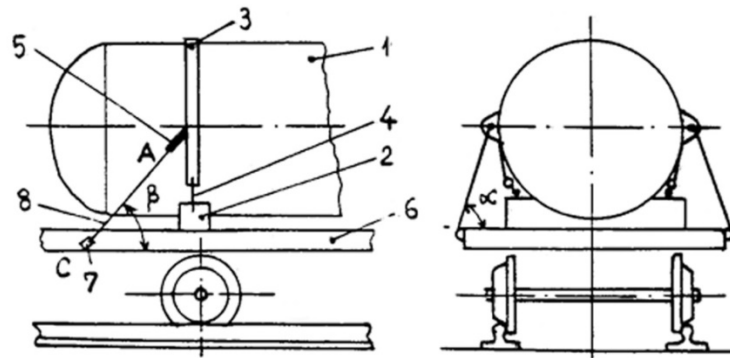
3. A way to anchor technological equipment on transport platforms (sketch) [1]
